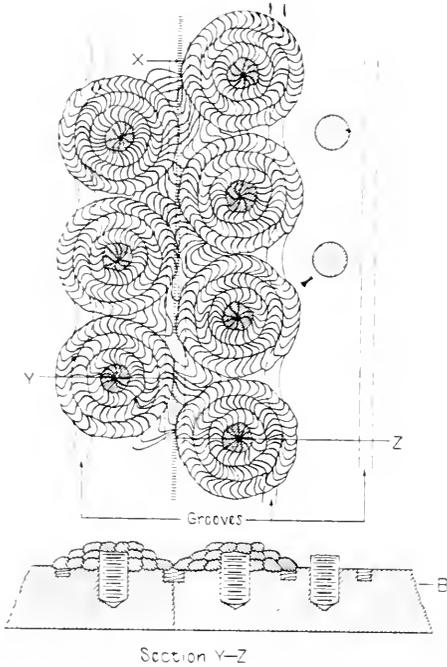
Procedure in Welding a Studded Joint in Which Square-section Grooves Have Been Cut to Protect Against Shrinkage Strains
